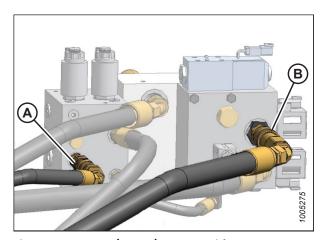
M150/M155/M155*E4* with Reverser Valve
